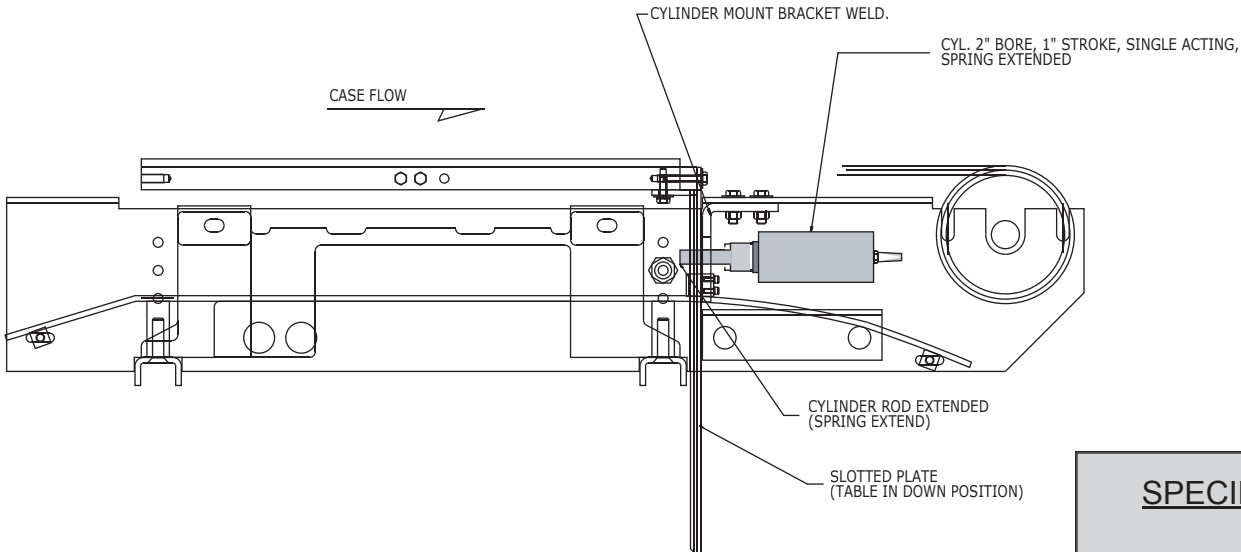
Table Lock Safety Cylinder (Shown in engaged position)
